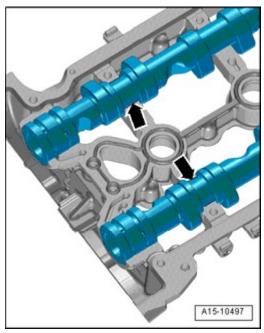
Identifying Axial Bearings Courtesy of VOLKSWAGEN UNITED STATES, INC.
